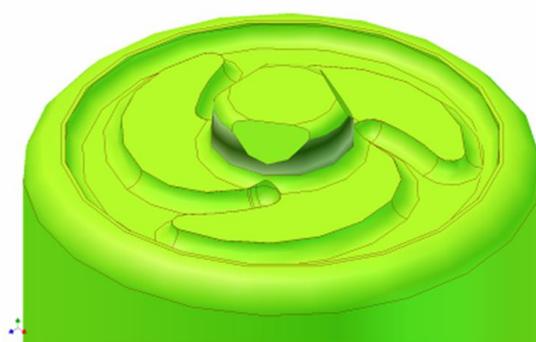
Design of Dynamic Forging tool with container ring to increase localized forging
